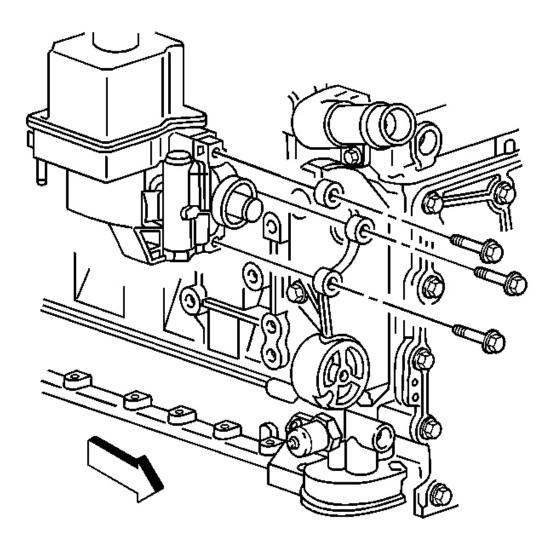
View Of Power Steering Pump Bolts Courtesy of GENERAL MOTORS CORP.
